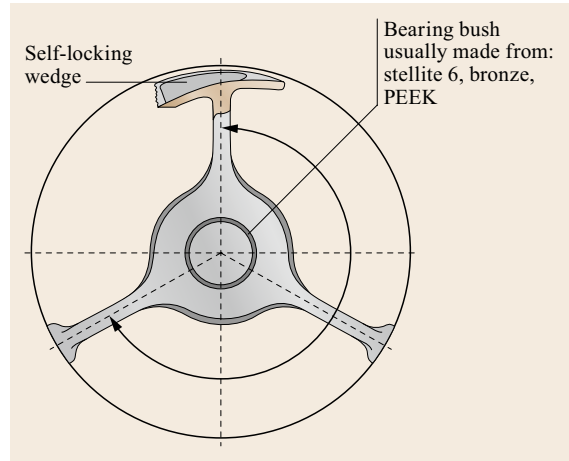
Spider bearing in an SSE (courtesy of BORSIG)
